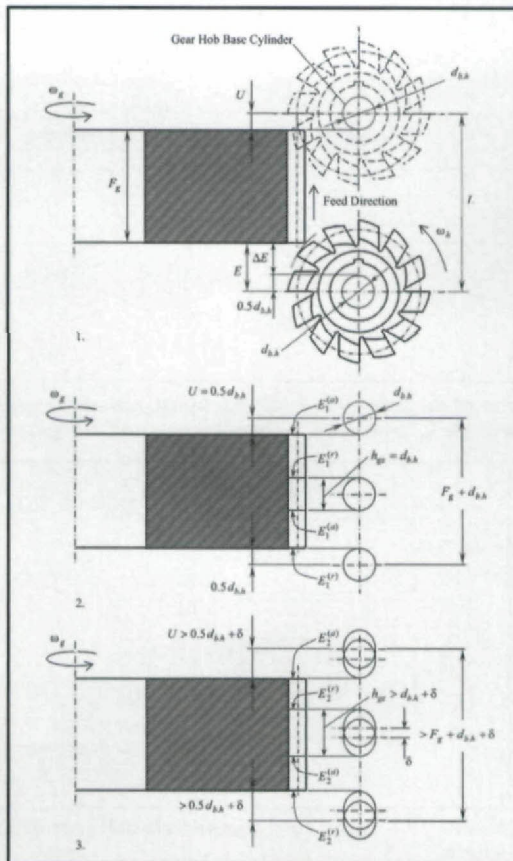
The impact of gear hob-setting angle on the length of the hob idle distance in climb hobbing of involute gears.
